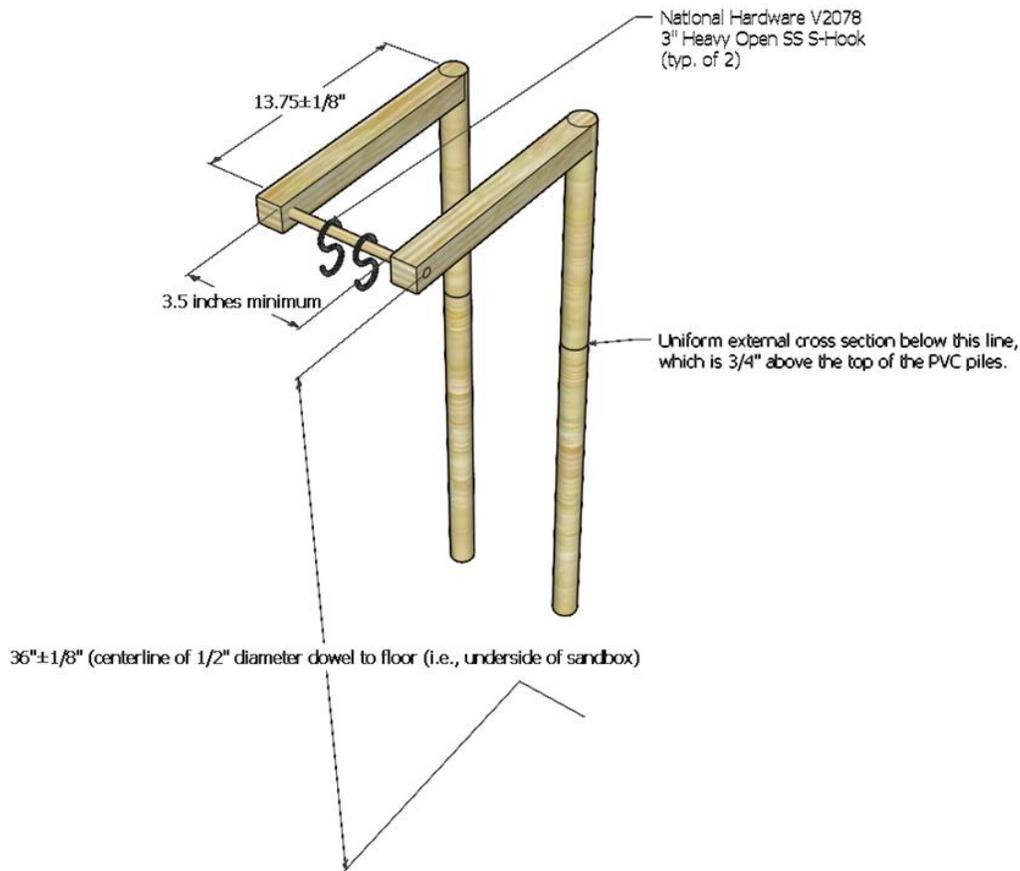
Dimensioned hardwood load frame. See Sketchup Pro model for other views. Note: the shape of this load frame is shown schematically only.
